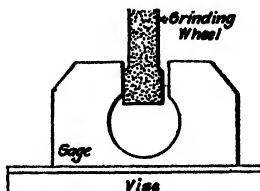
This figure shows a wheel relieved on the sides for "face-grinding a snap gage."
